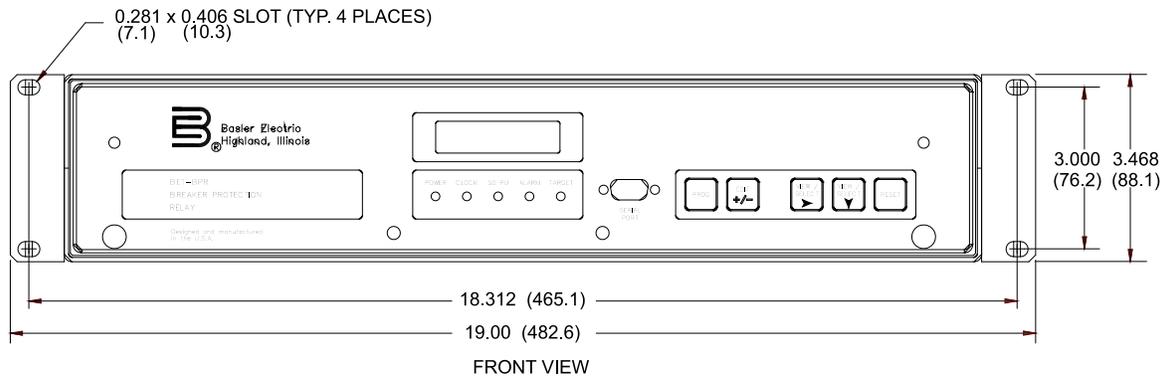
Overall Dimensions (Horizontal Rack Mount)
